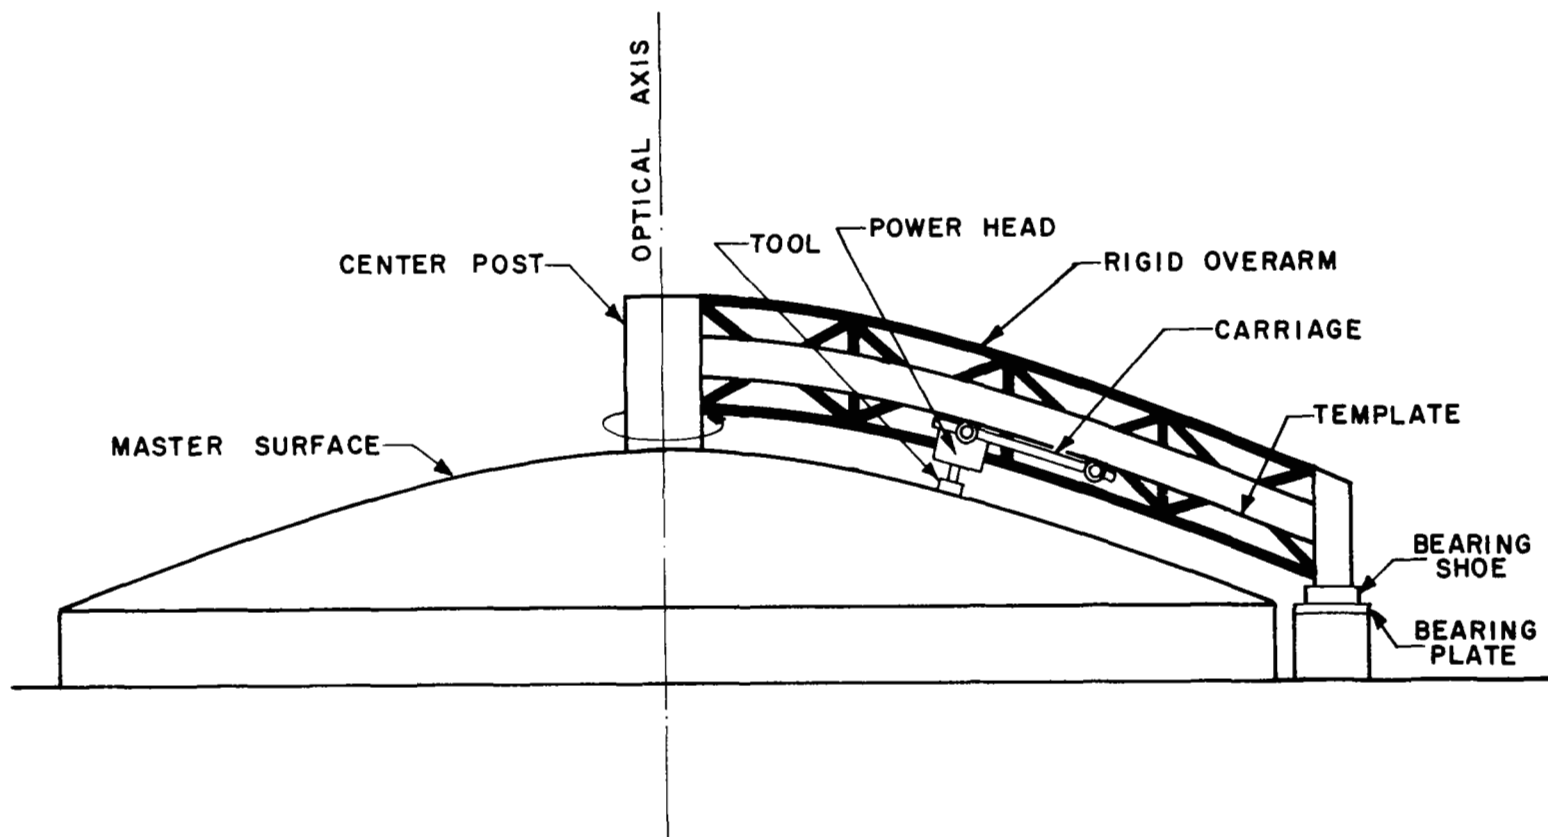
TEMPLATE MACHINING OF PARABOLOIDAL MASTER
